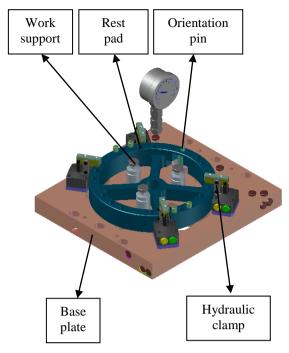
Isometric 3D view of fixture assembly without workpiece and rotary table
